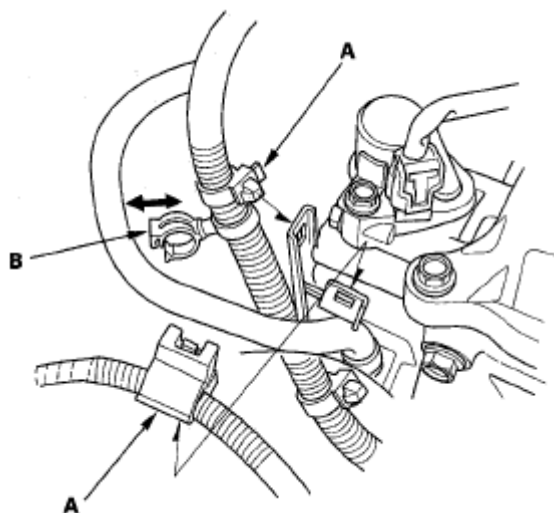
Identifying Positive Crankcase Ventilation (PCV) Hose Clamp
